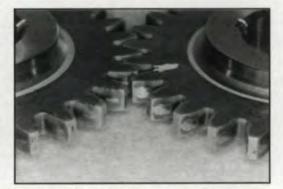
Contact surfaces of multi-metal fatigue test gears after testing.
